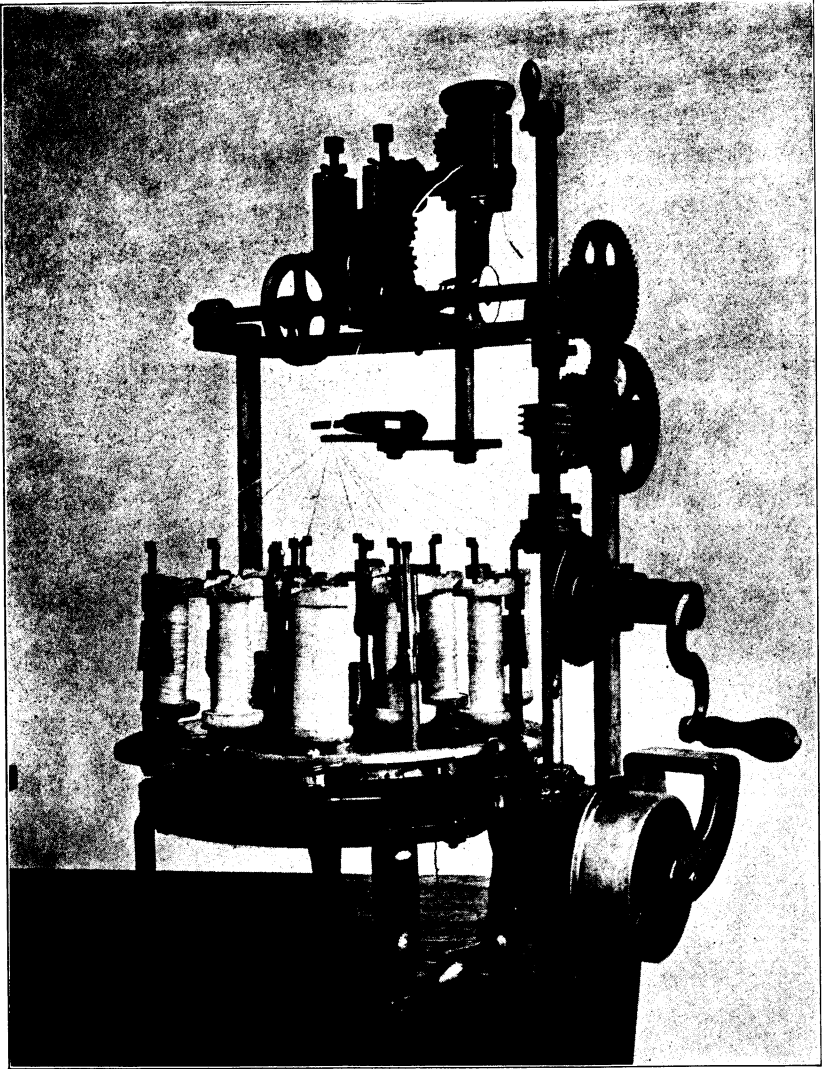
Plate XI. Thirteen-spool braiding machine of the New England Butt Company.
